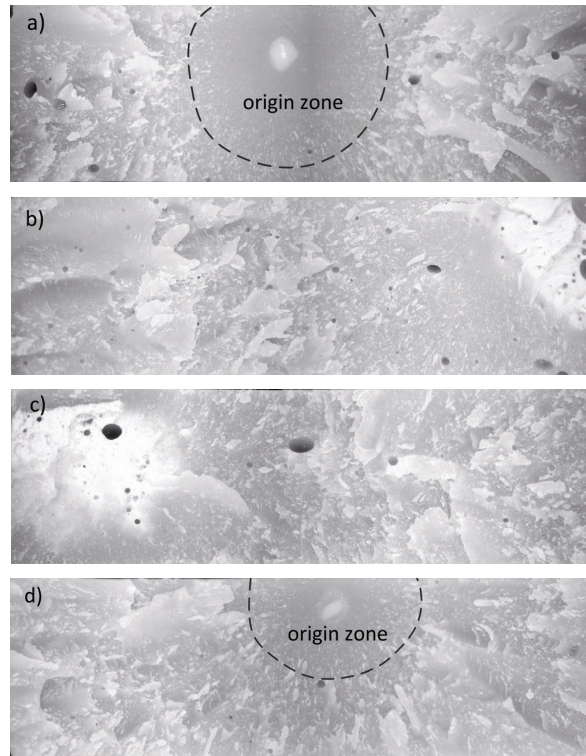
Typical fracture surfaces ($13 \times 4 \text{ mm}^2$) of specimens: a) P21, reference; b) PD50 at $\Delta w=3\%$; c) CD13 at $\Delta w=1.6\%$; d) PD50 dried.
